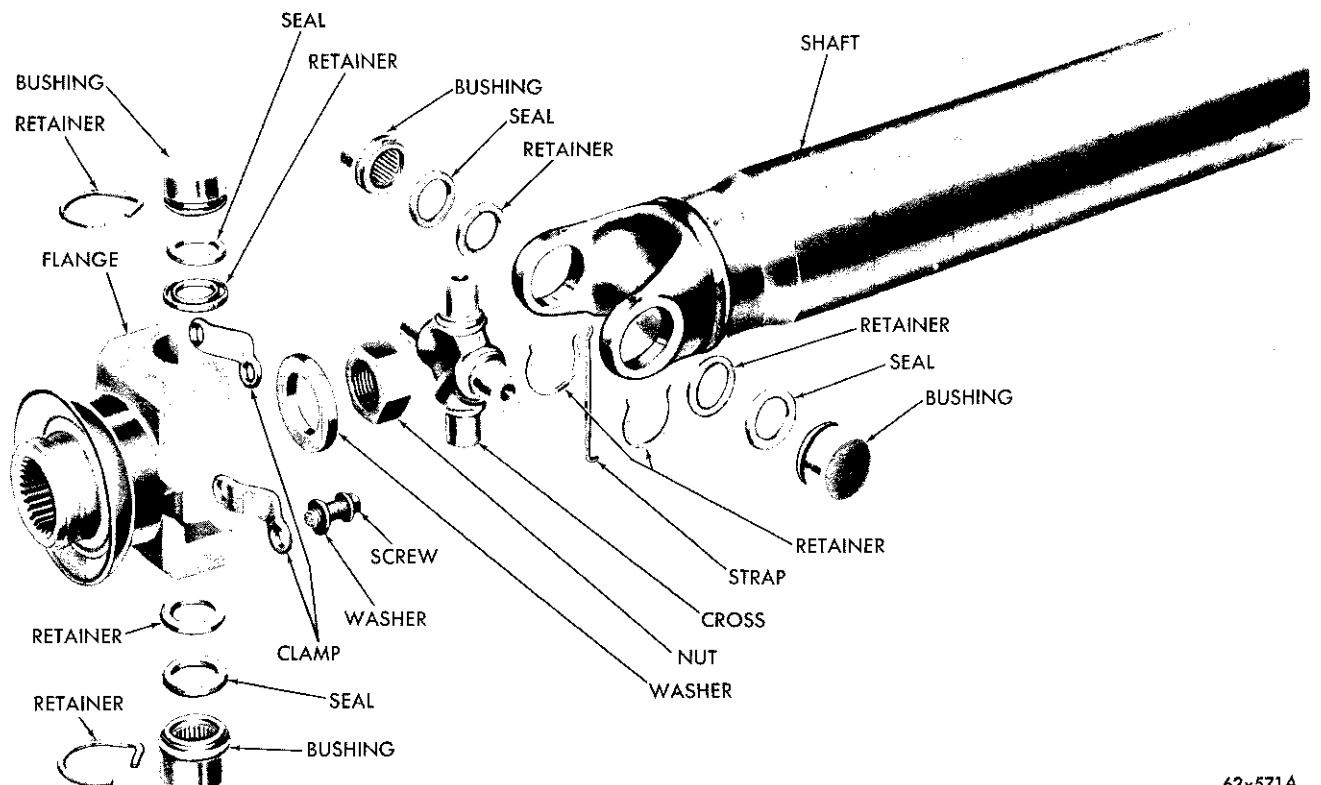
Cross and Roller Universal Joint—Rear (All Models)
